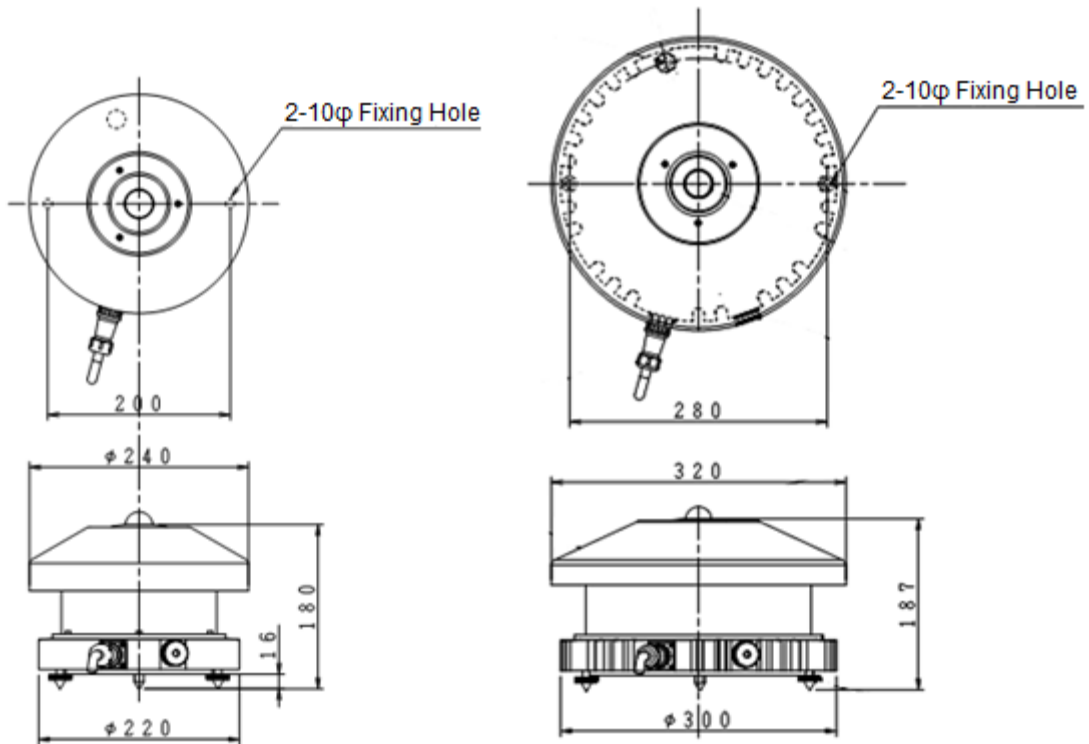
Sensor Part Dimensions (Left: MS-711N, Right: MS-712)
